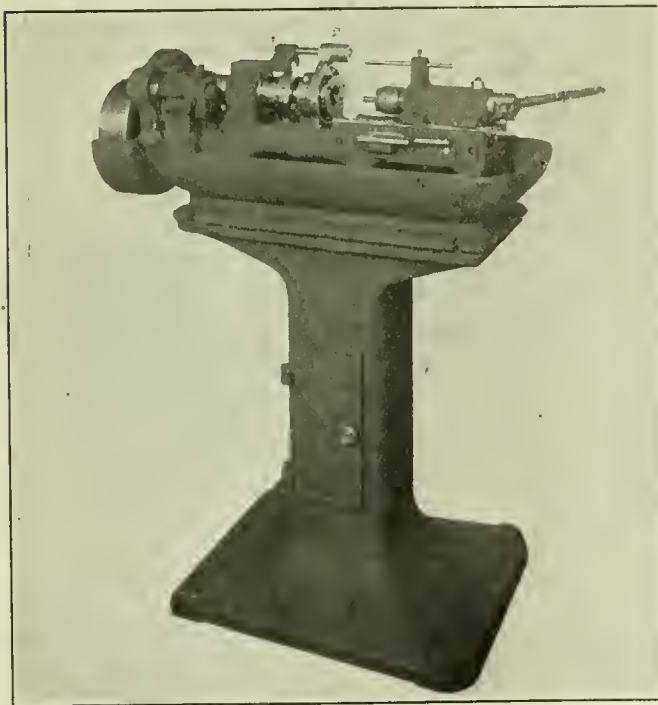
H & G Single Spindle Threading Machine, Model SS
